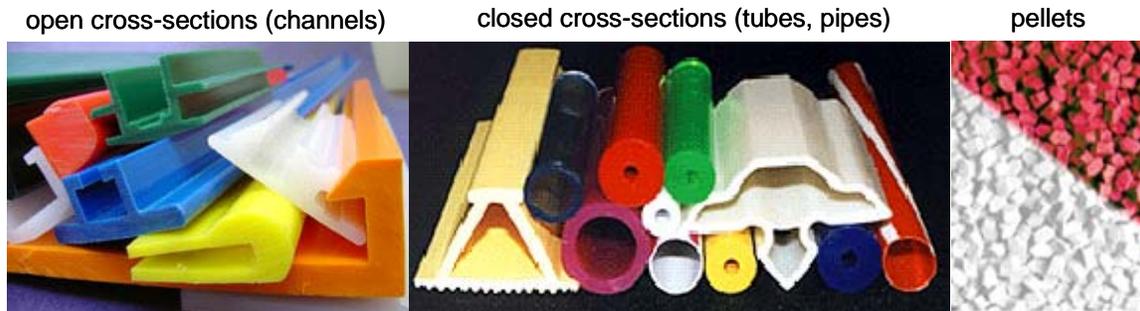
Parts made by extrusion [sources: websites of keltrol.com, seilerpc.com]
